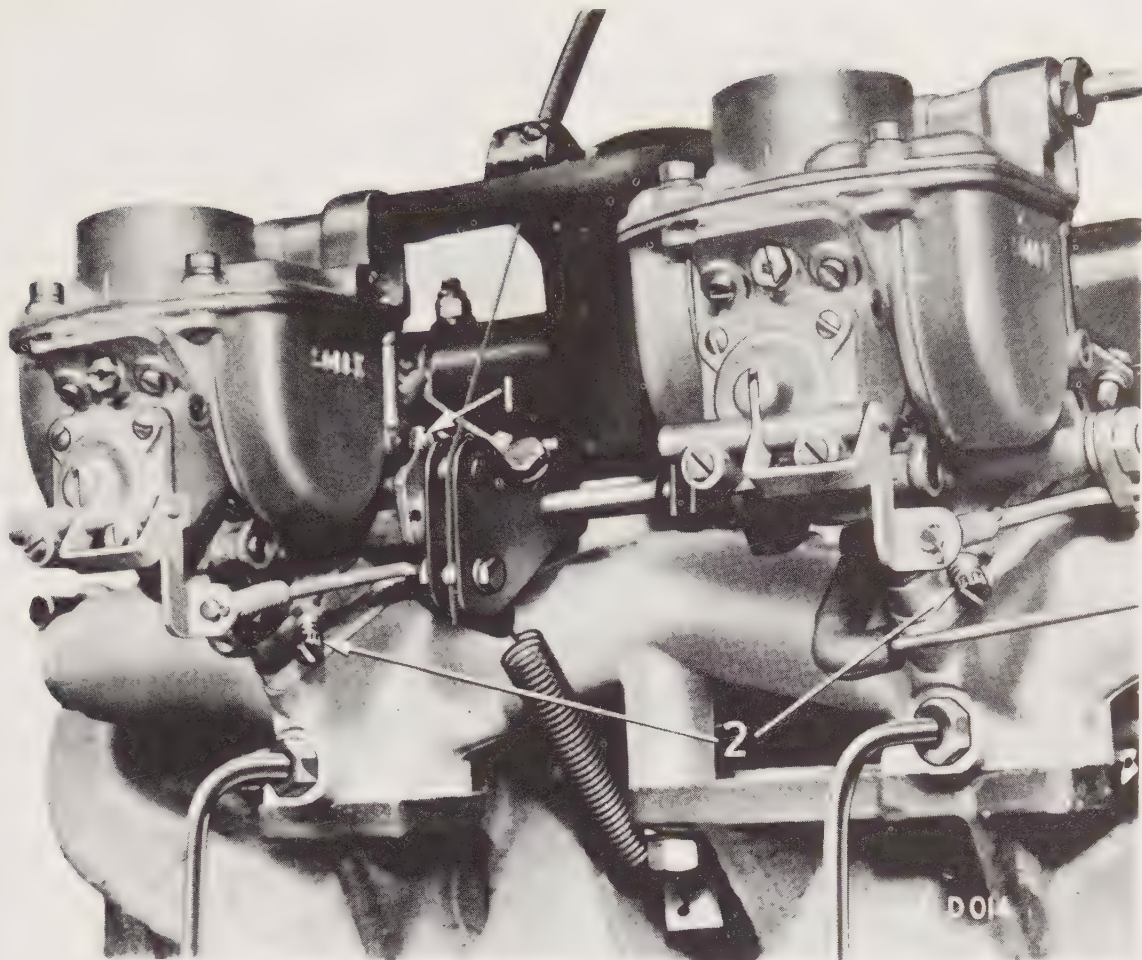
6 Twin Solex type B32 P1 H carburetters in position on 1600 cc 'Vitesse' engine.
